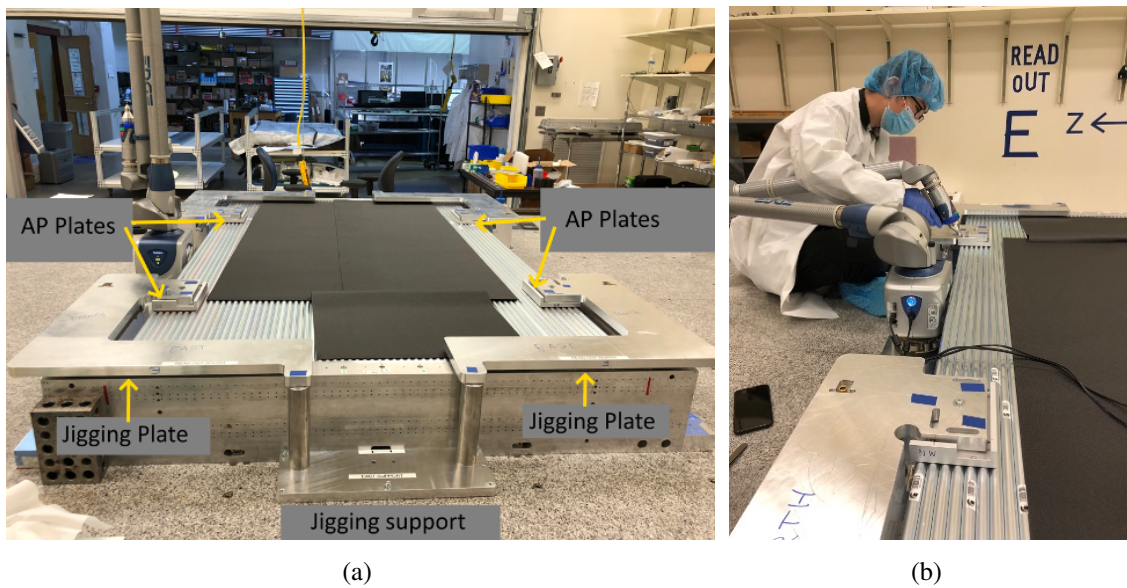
(a) Four AP plates on the top corners of a SMDT chamber, each held by a screw to a L-shaped jiggging; (b) a FARO-arm probe is used to check and adjust locations of AP platforms before and after gluing. Final positions are measured after glue is cured.
